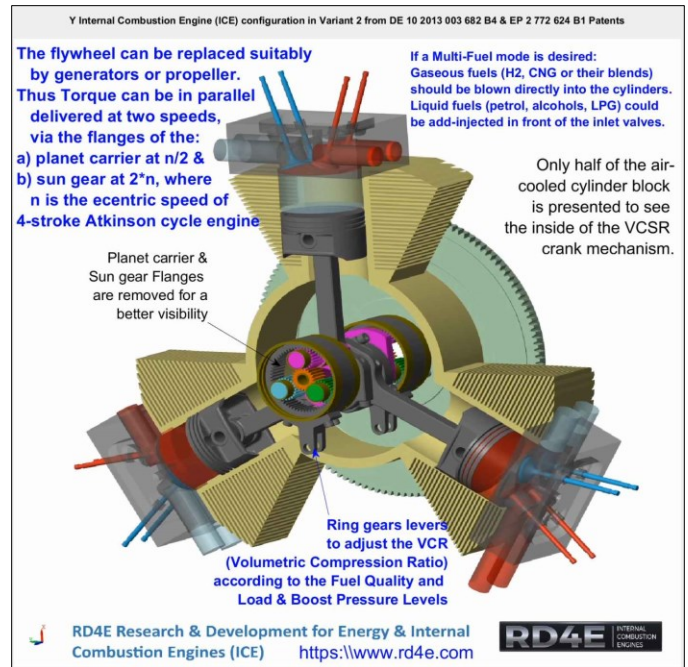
Some inward details of the Gearing of the 3Y crank mechanism.
